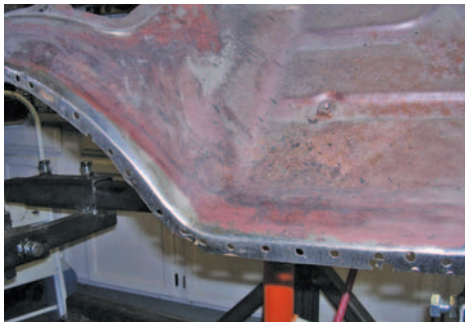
The entire flange was then coated with a weld-through primer.
